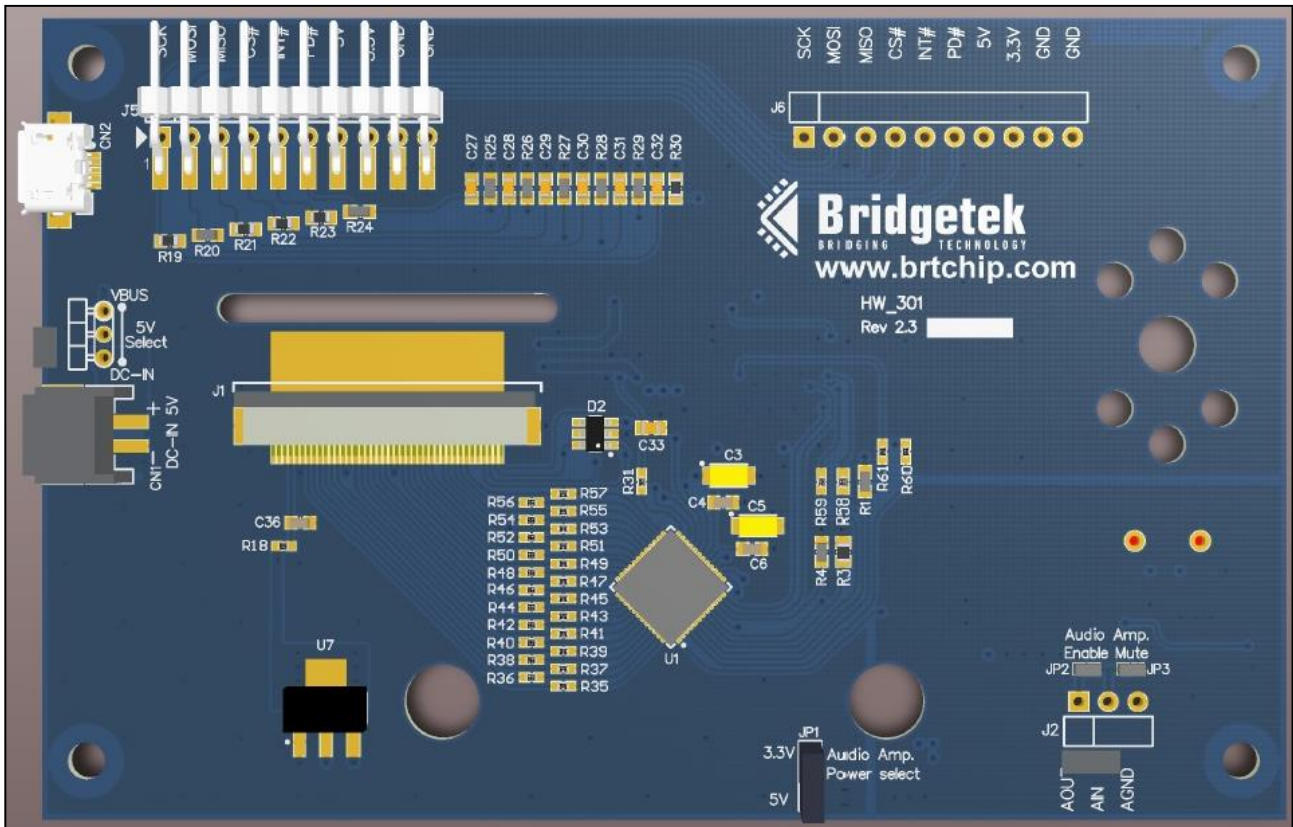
VM800B module PCB view, 4.3- and 5-inch display version
